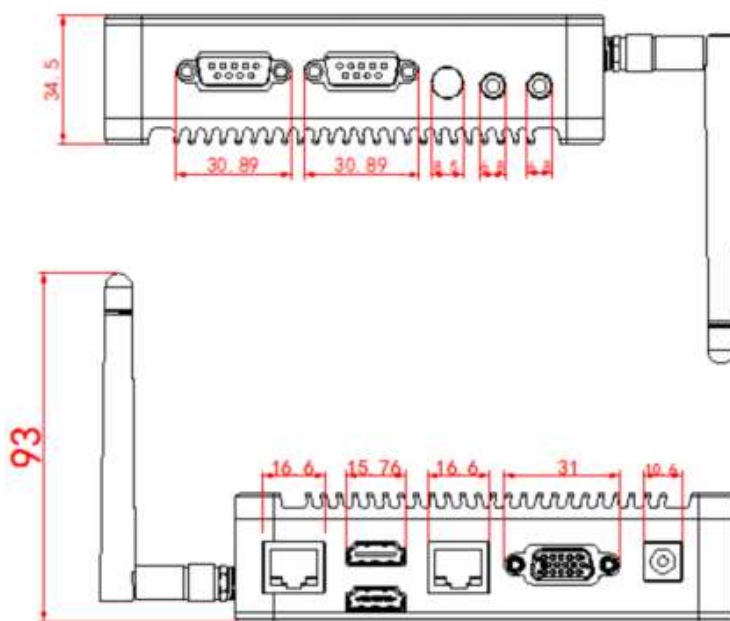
NIS-B987 Side cover mechanical dimension drawing
